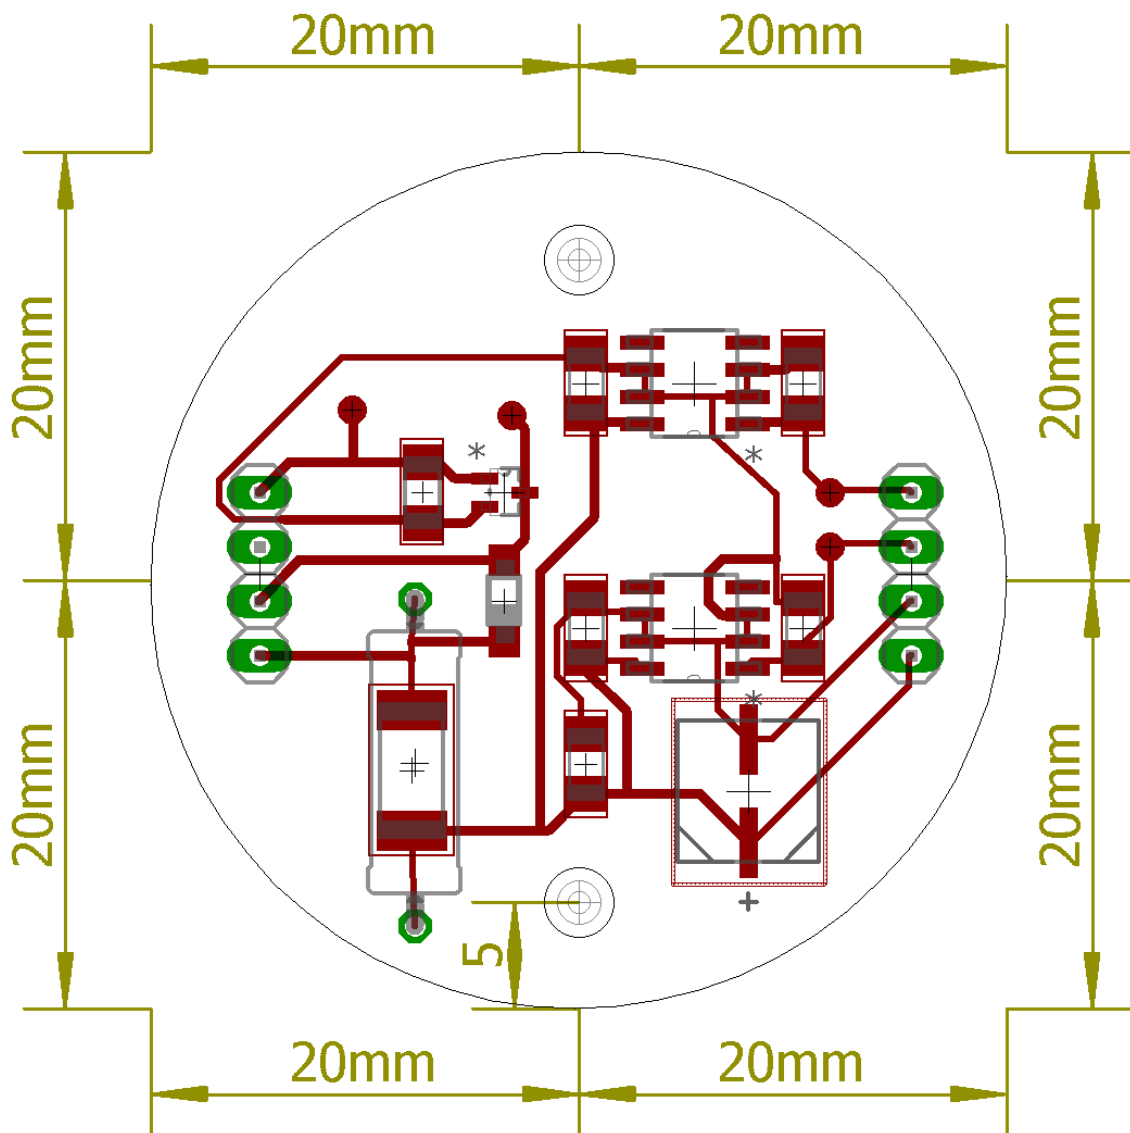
Initial PCB Footprint - Tx layer (only top layer).
